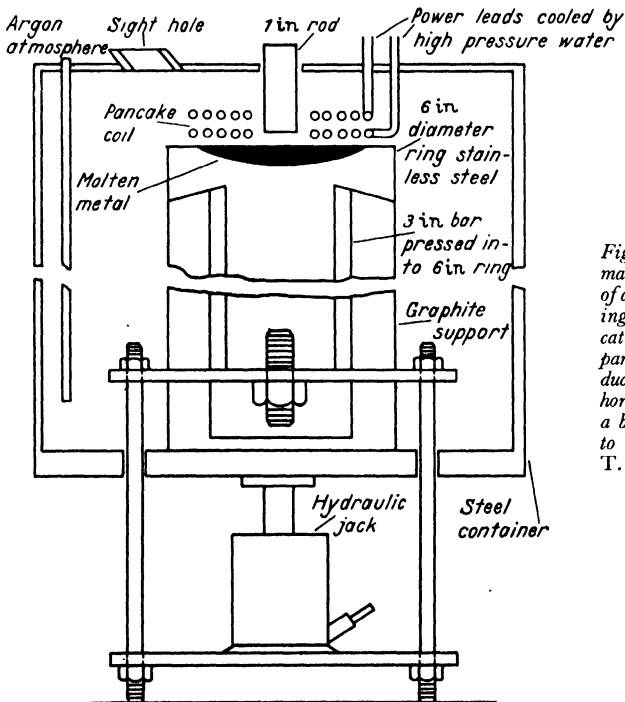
Schematic arrangement of auto-crucible melting apparatus, indicating position of pancake-shaped induction coil near flat horizontal surface of a block of the metal to be melted (after T. T. MAGEL *et al.*¹¹)
